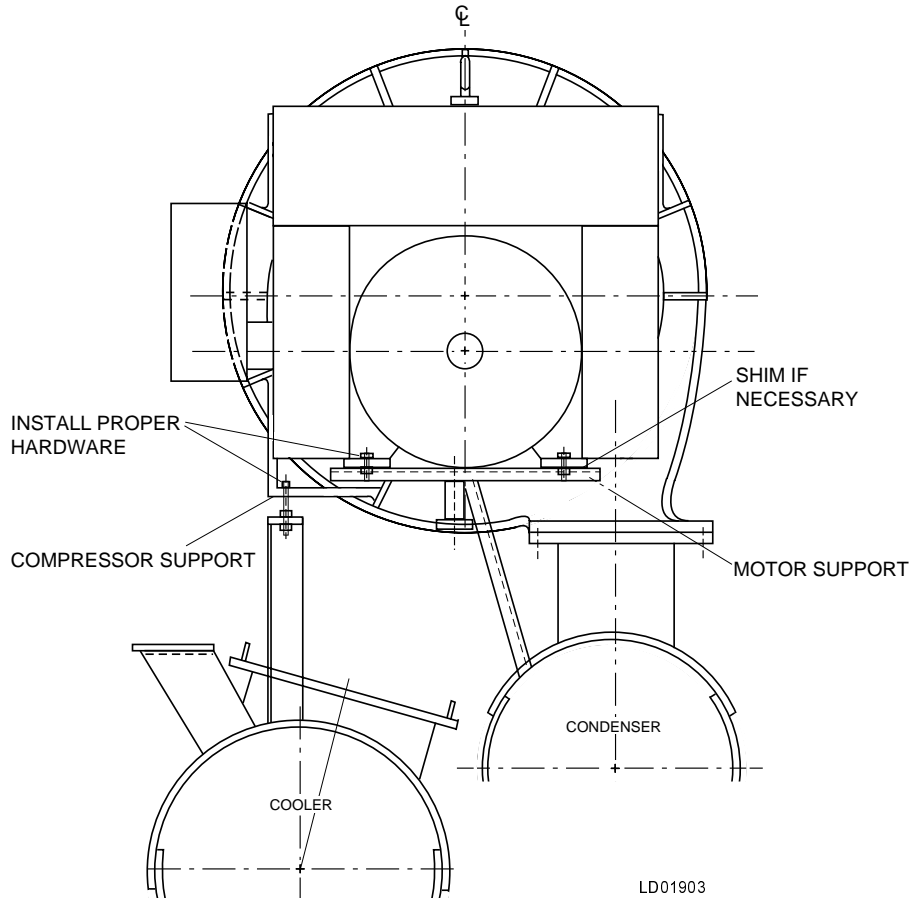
MOUNTING COMPRESSOR / MOTOR (E COMPRESSOR UNITS)
